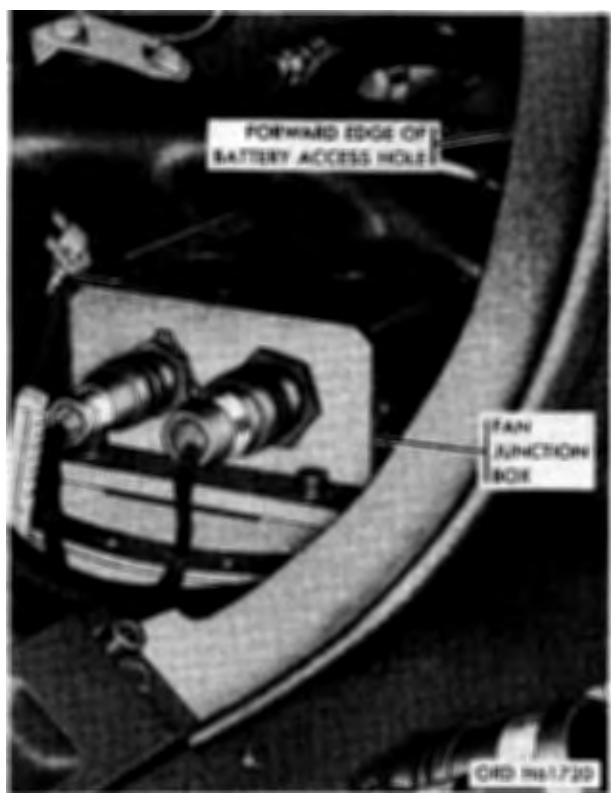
Fan junction box assembly -- locator view with missile battery removed.
